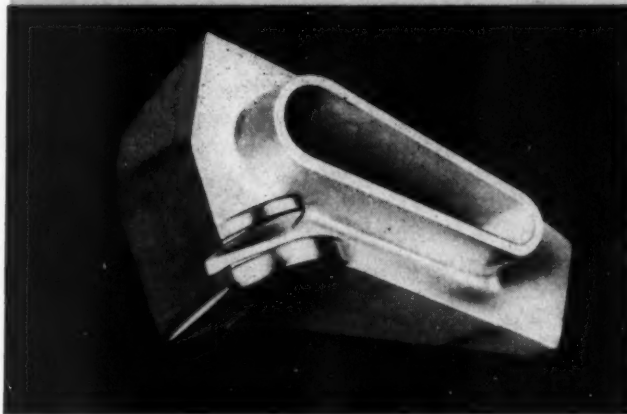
Above—The "lost wax" casting process can produce at considerable savings intricate small parts such as this that compare closely with machined bar for tolerance and smoothness
